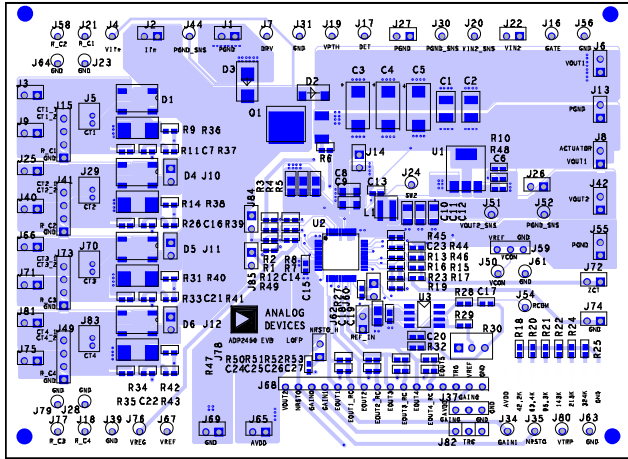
ADP2450ASTZ-3-EVBZ Layer 1, Component Side
